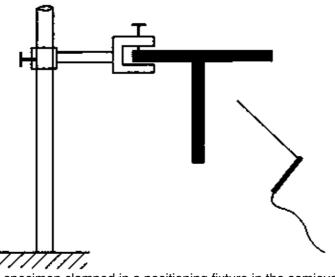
Fillet weld specimen clamped in a positioning fixture in the semioverhead position
